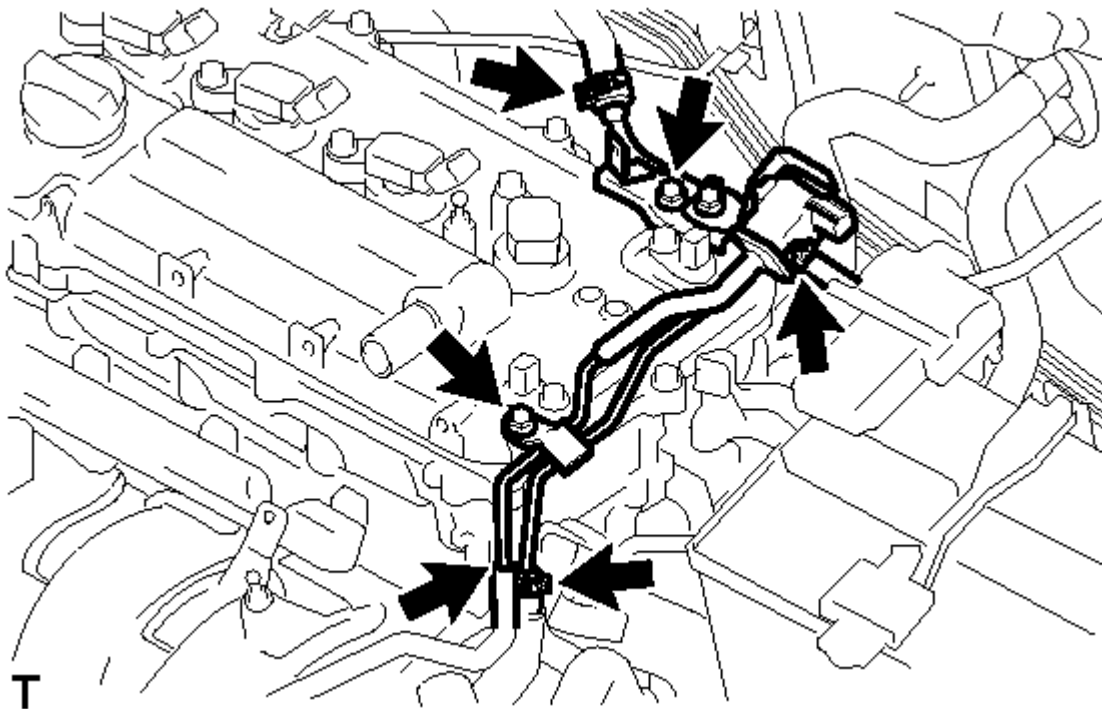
Identifying Air Tube Assembly Bolts & Hoses
